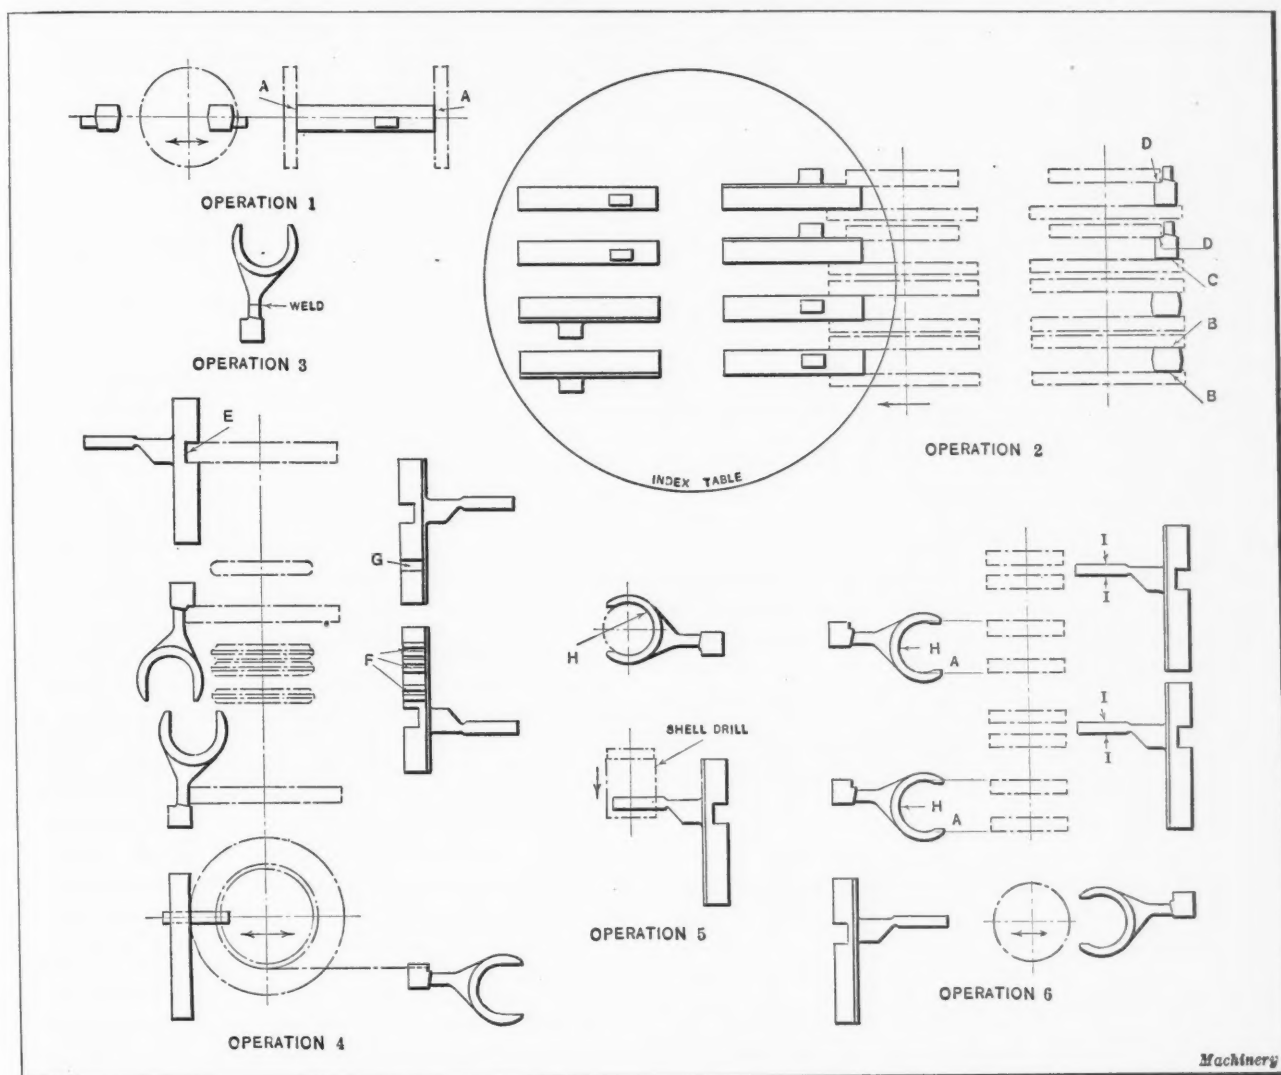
Lay-out of the Six Operations performed on the Gear-shift Fork with the Improved Tooling
